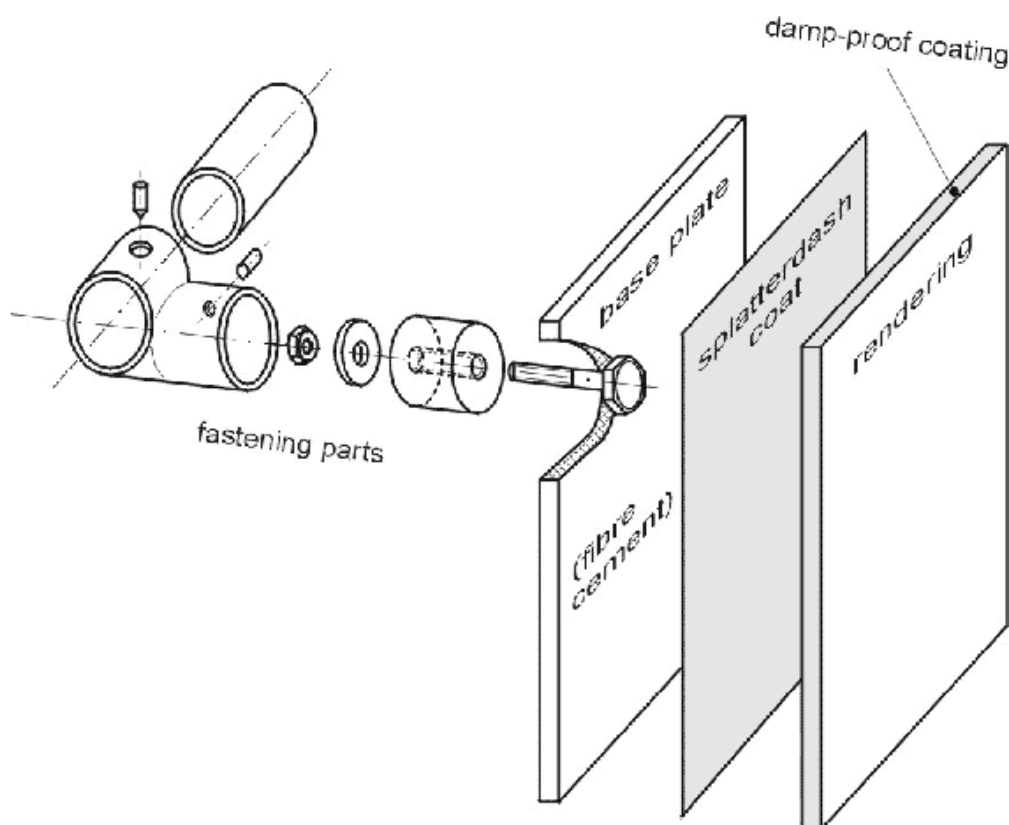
Clamping device to mount rendering plates on an outdoor rack for atmospheric exposure (SO_2), shown in an exploded view (see also Fig. 5)
